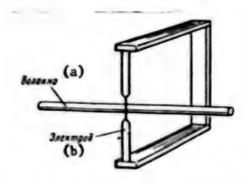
Electrical arc welding of fibers. a - fiber; b - electrode.
